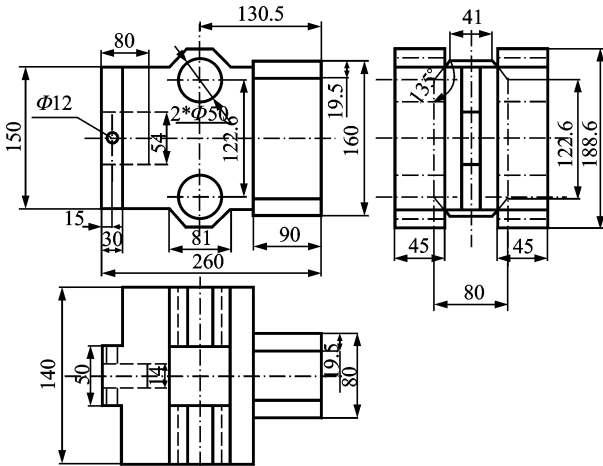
Design drawing of the dynamometer for linear friction welding
